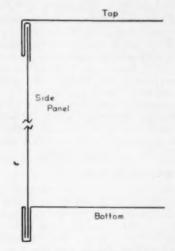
HOW TOPS and bottoms are welded
